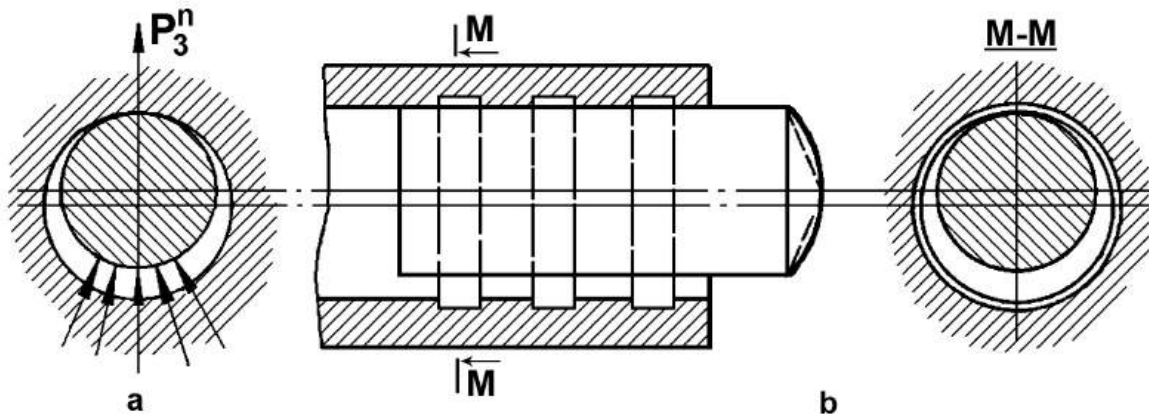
The unbalanced fluid pressure in the eccentric clearance between the piston and the cylinder
